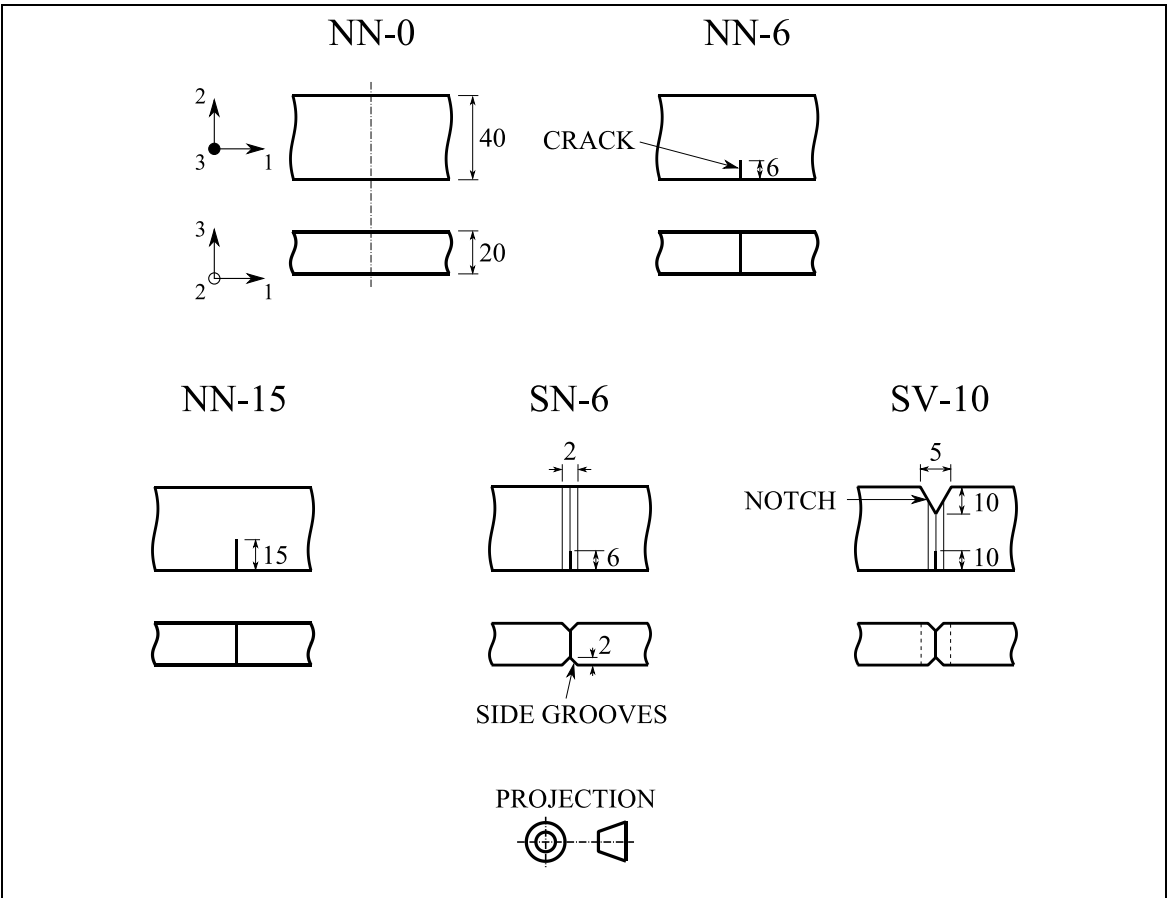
Features machined at the centre region of the beam specimens. Dimensions are in millimetres.
